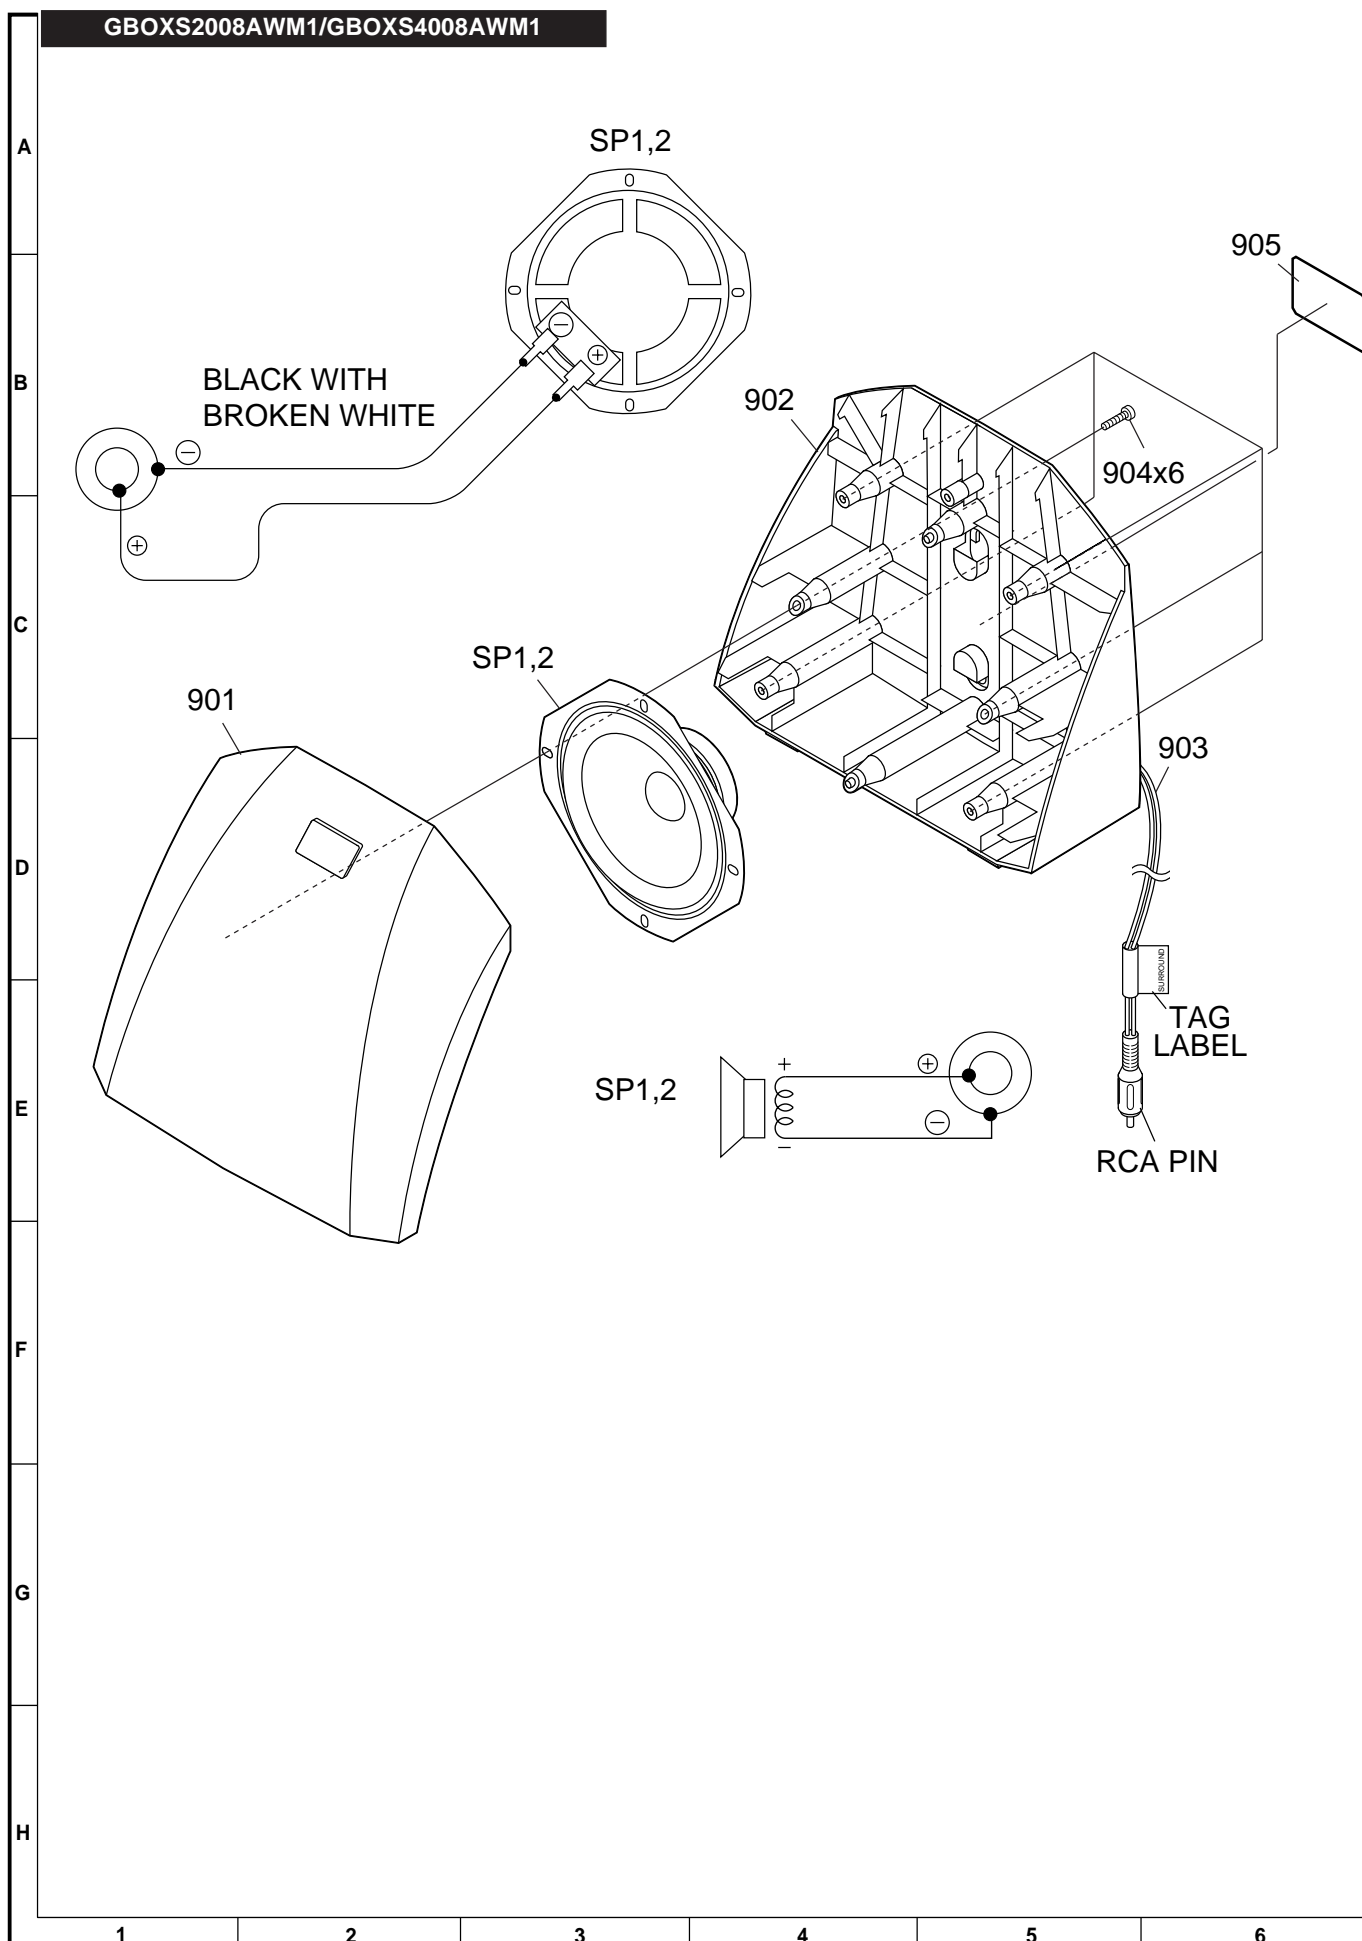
SPEAKER EXPLODED VIEW (3/3)
